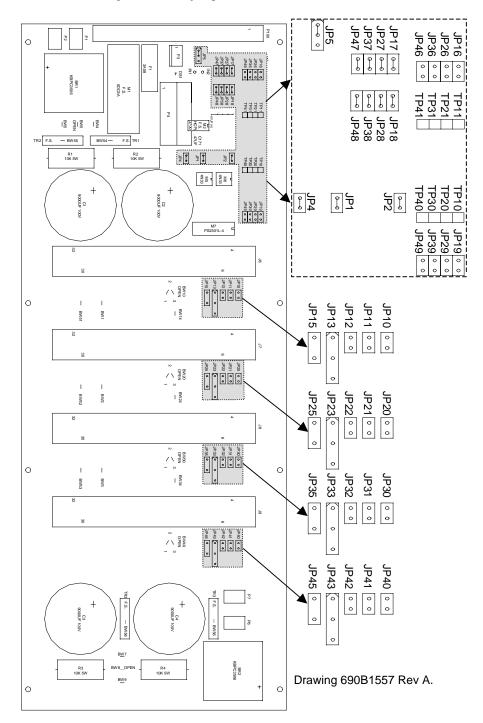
DR300 Drive Interface Board Jumper Locations
